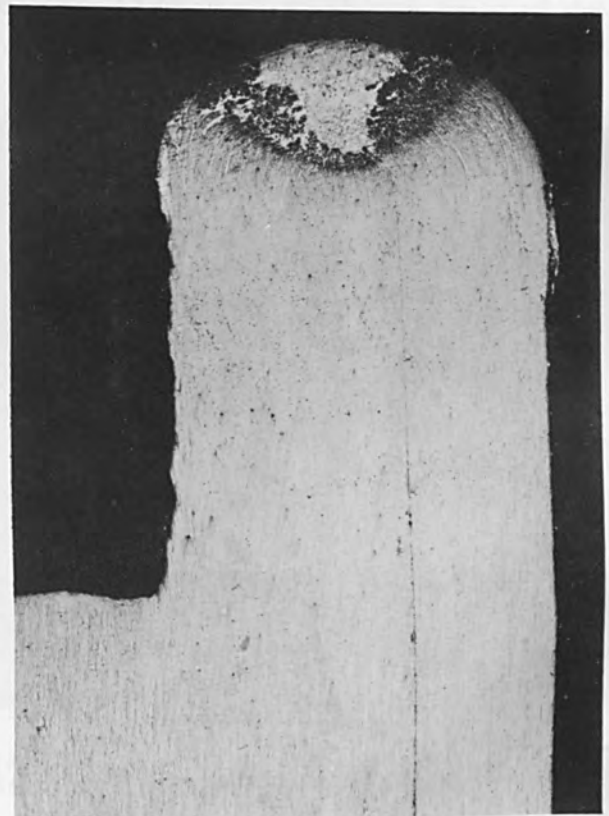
Type a - welding S.A.P. 930 degassed. X25
